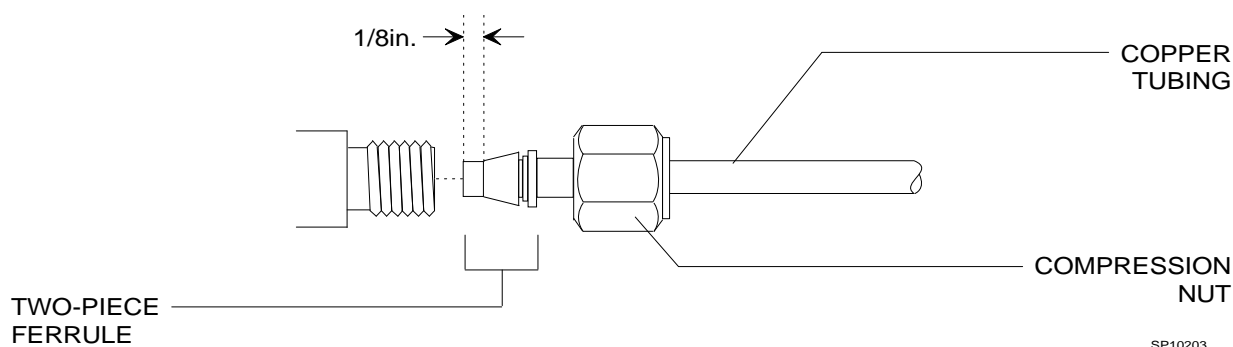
SUCTION SYSTEM PIPING INSTALLATION
